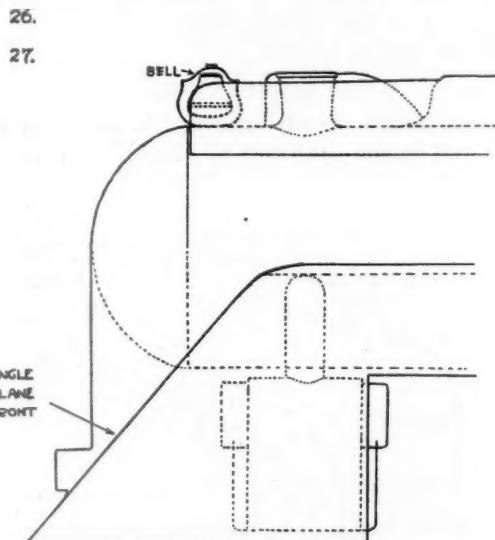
Drawing of model incorporating further modifications 26 and 27
